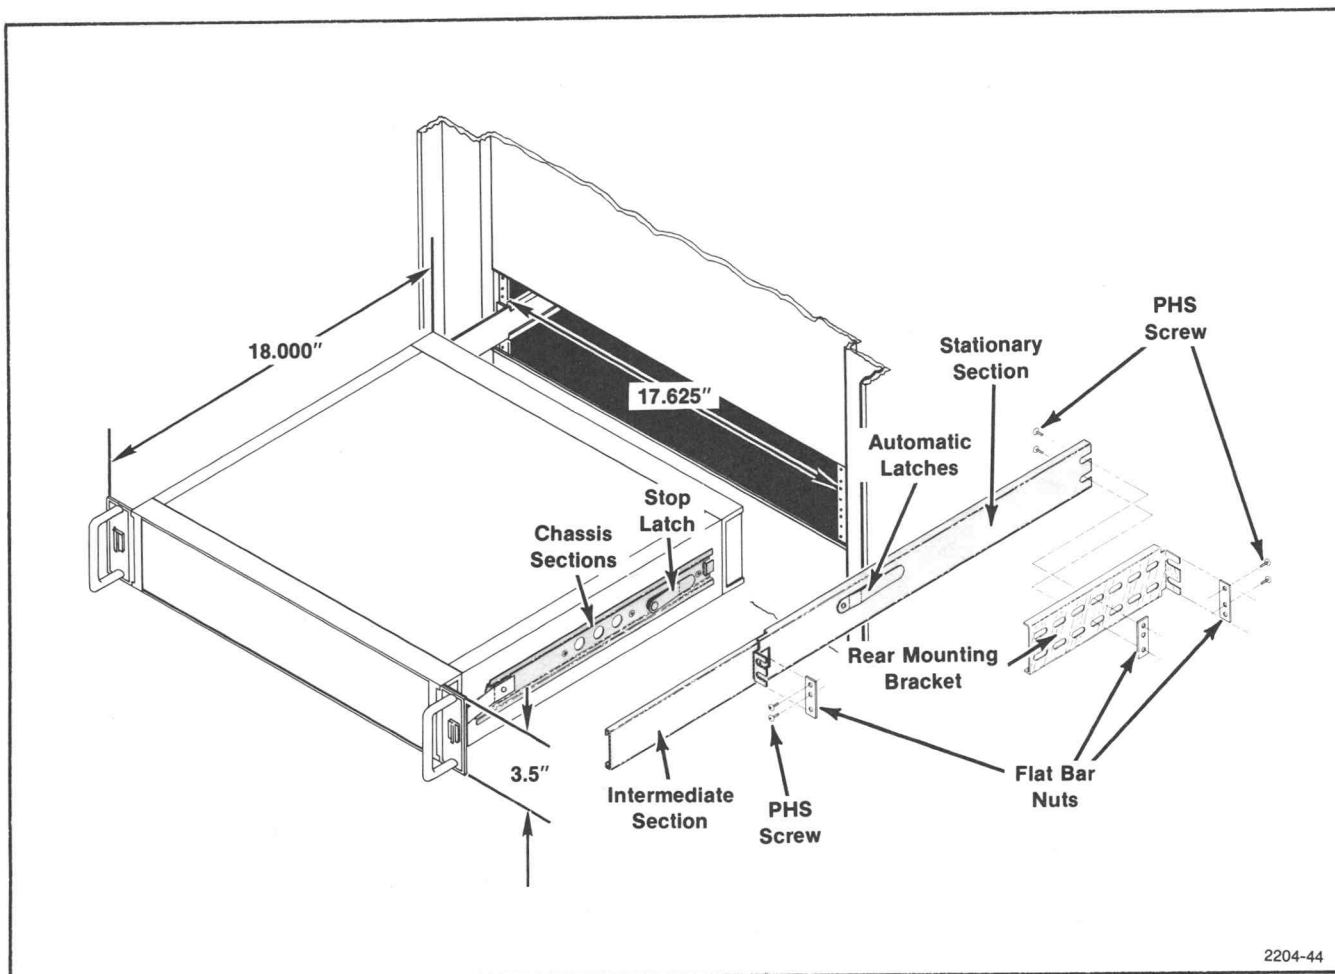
143 fully extended showing slide out tracks and dimensions.
